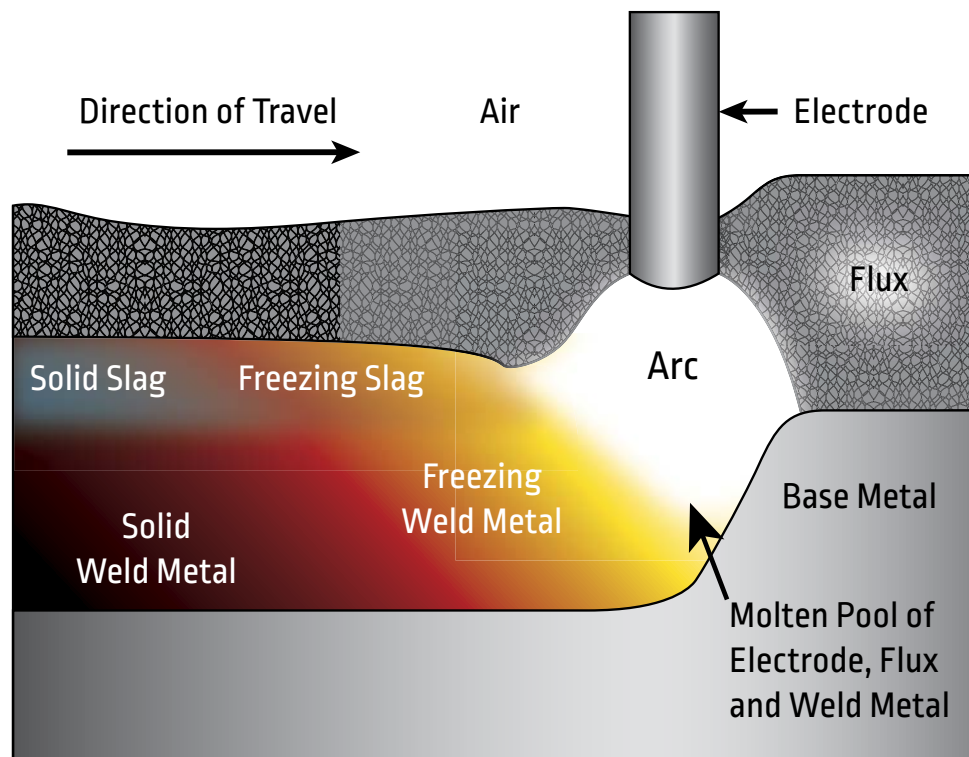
Cross Section of a Typical Submerged Arc Weld
